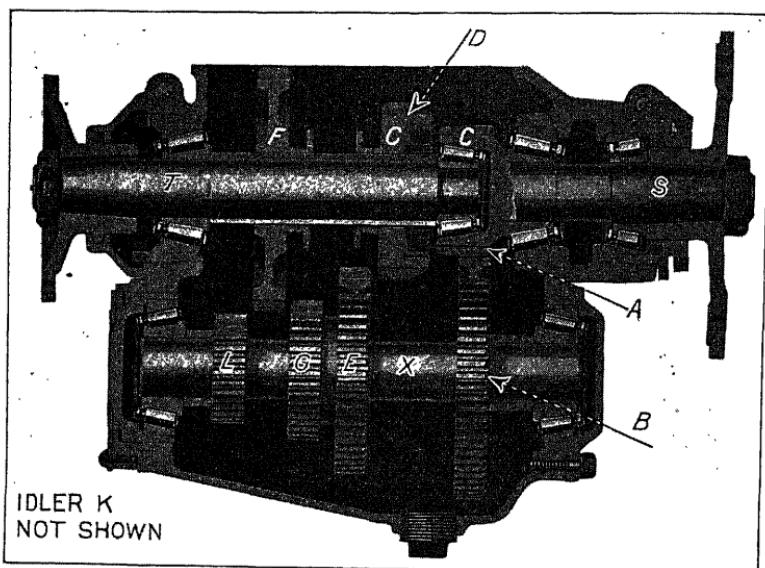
Automobile transmission gear box. Timken Bearing Co., Canton, O.
